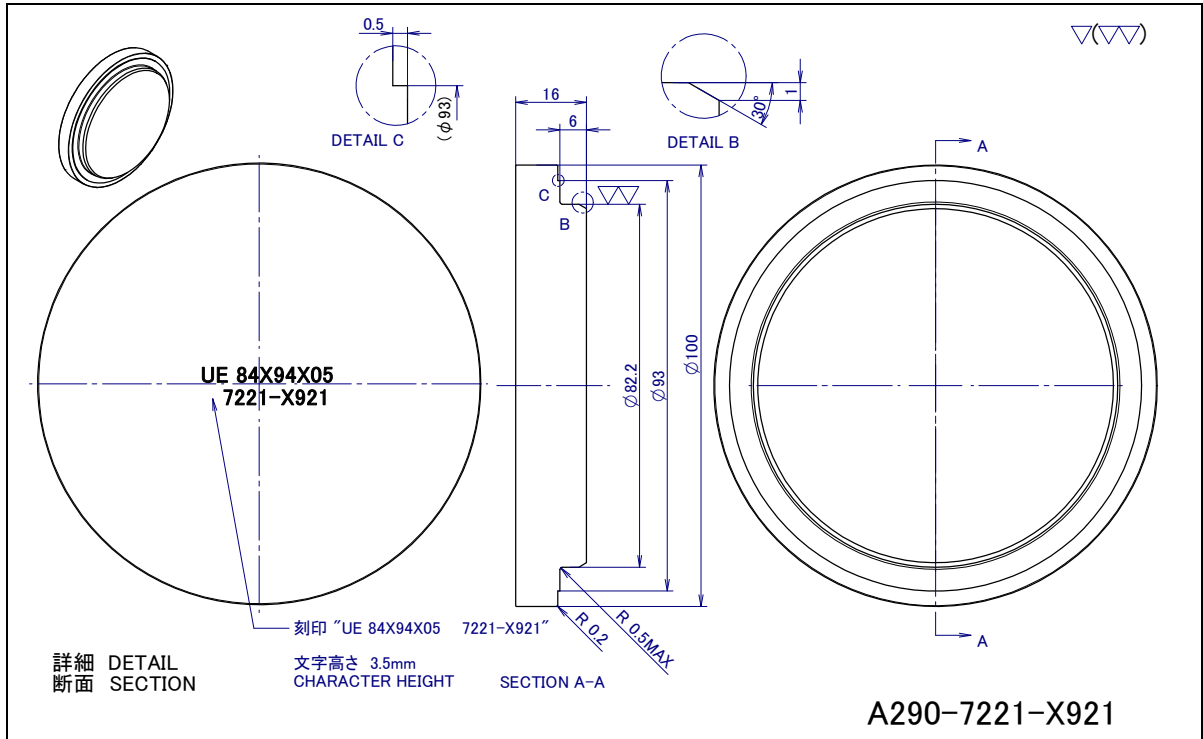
(a) Oil seal installation fixture for J4-axis gearbox
